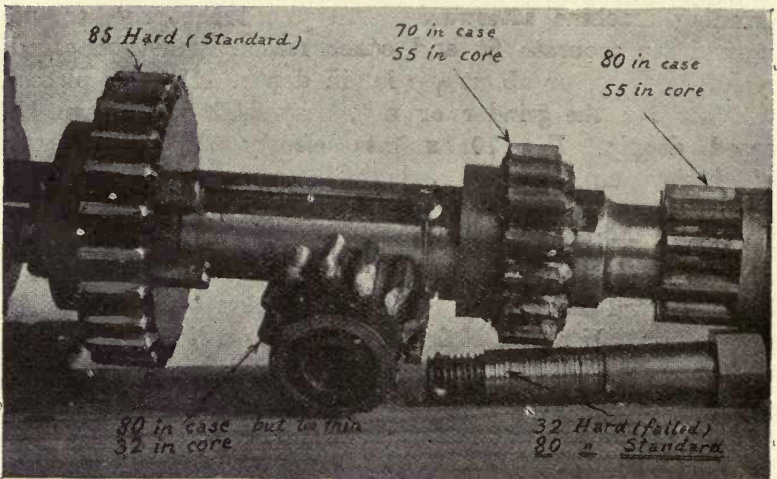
Automobile gears. Soft and hard spots due to faulty carburizing or unequal cooling. Standard of 80 scleroscope hard fails in places.
